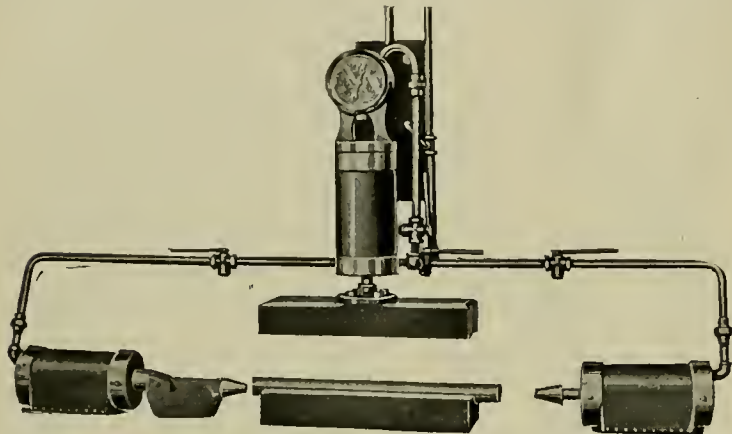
MACHINE USED BY SOUTHERN RAILWAY FOR FITTING UP HOSE.
